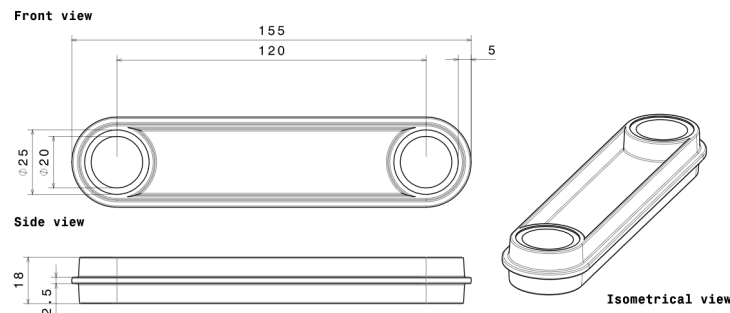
Front, side and isometric view of the geometry of the tension rod (dimensions in millimeter).
